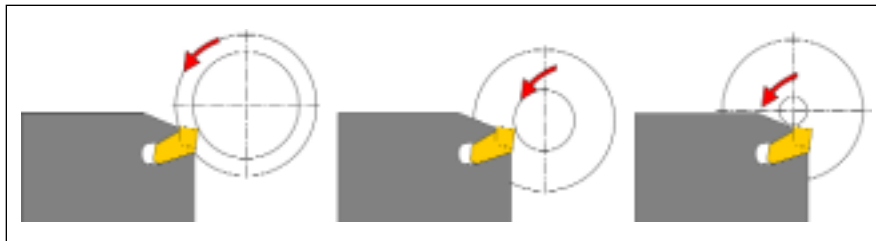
As the insert approaches center when parting solid bar stock, the rotation of the part can actually pull the insert out of the pocket. The stub burr left in the center of the part that is still held by the chuck climbs over the cutting edge and, as it continues to rotate, pulls the insert from the wedge pocket.
